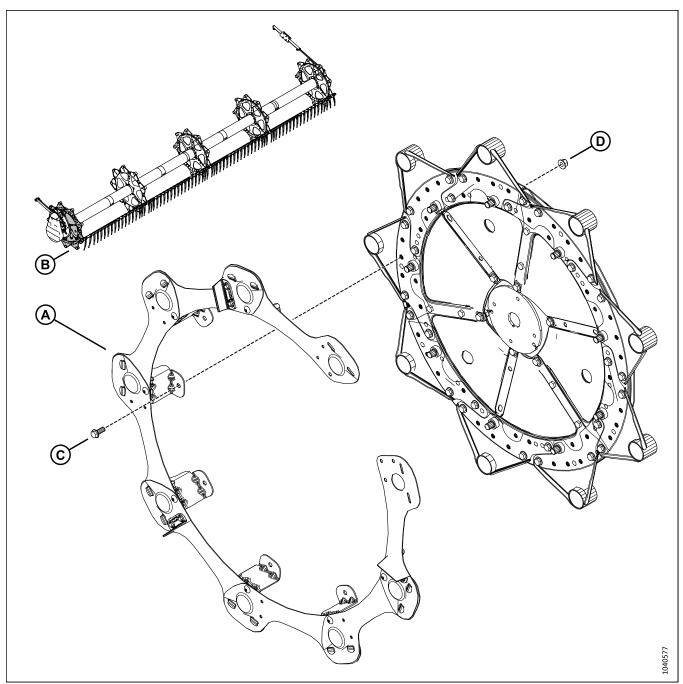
Nine-Bat Reel – Initial Endshield Assembly
